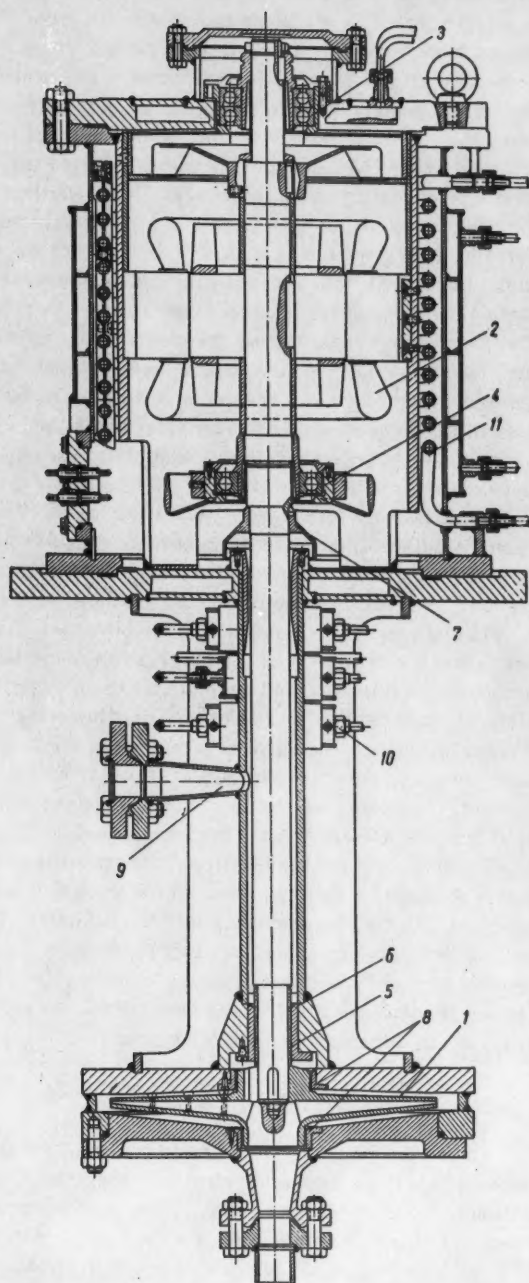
Centrifugal pump with bearing of beryllium bronze and a built-in electric motor: 1) impeller; 2) asynchronous motor; 3) journal-thrust ball bearing; 6) bush; 7) protective collar; 8) sealing rings; 9) hole for the removal of leakage; 10) cooling chambers; 11) coil.
